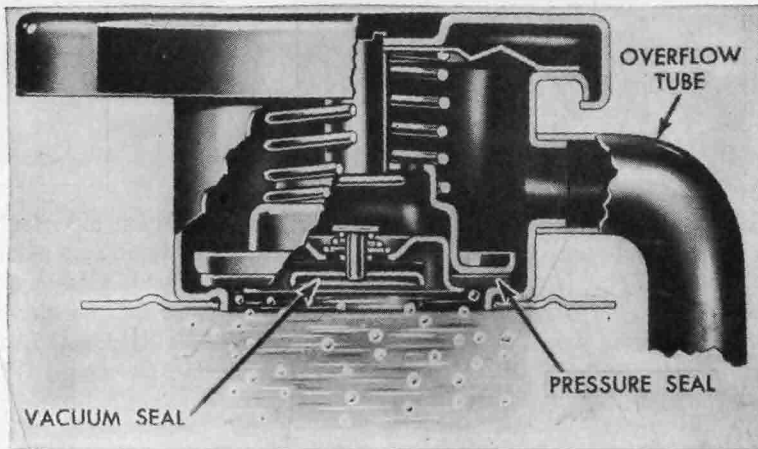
Cutaway view of radiator pressure cap showing pressure seal valve and vacuum seal valve.
